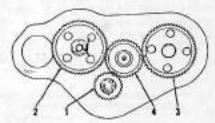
View showing timing marks on crankshaft gear (1), camshaft gear (2), injection pump drive gear (3) and idler gear (4) on four cylinder engines.
